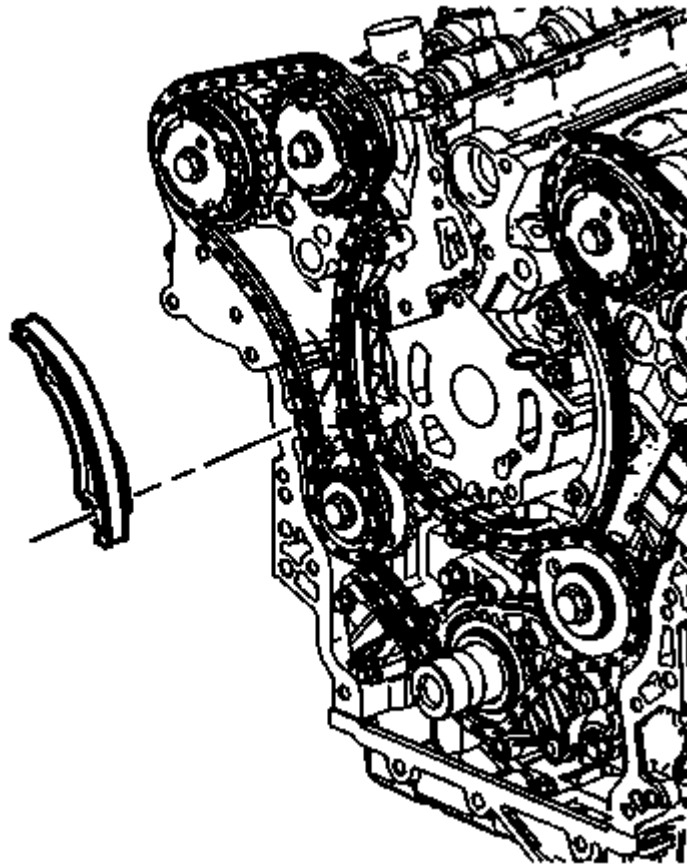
View Of Right Secondary Camshaft Drive Chain Shoe
